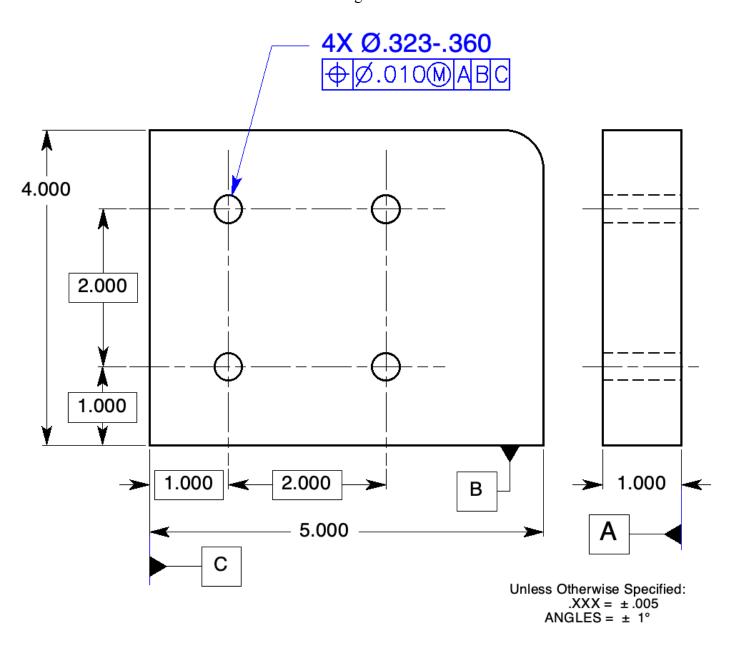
Floating fastener tolerance: Prob. 1.
